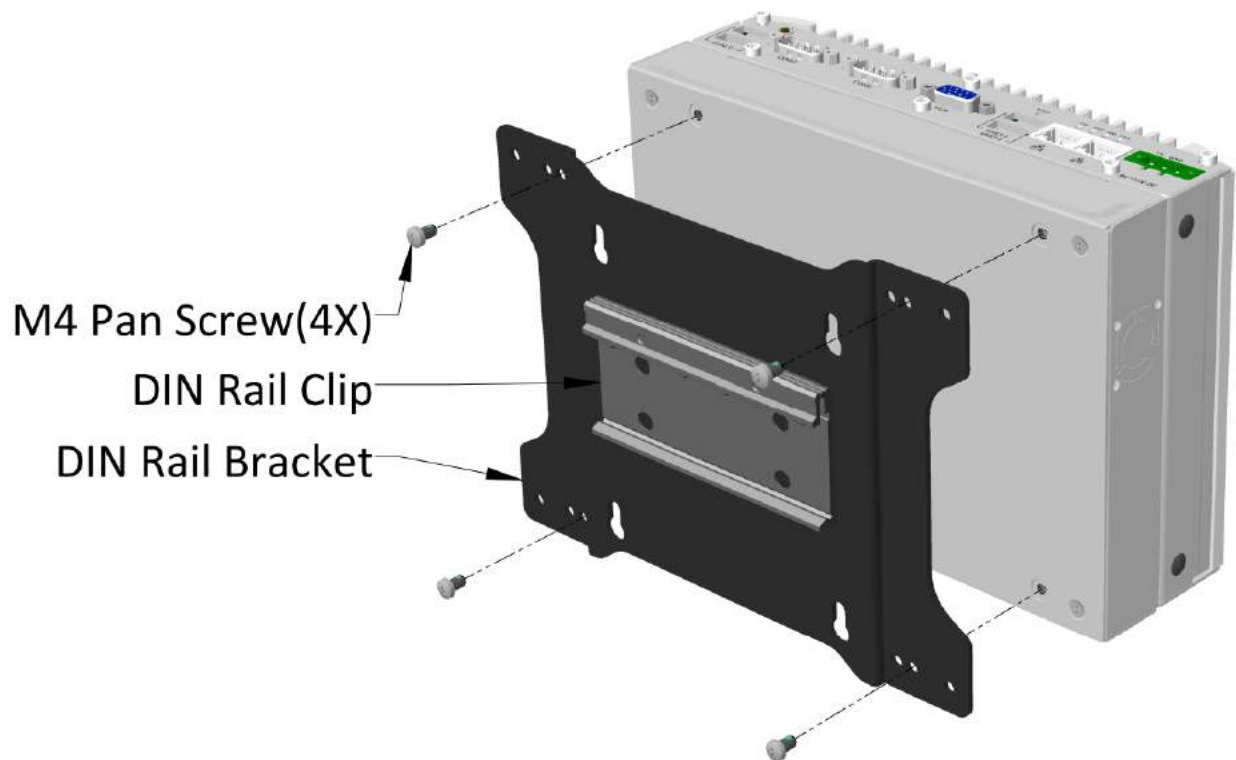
Assemble the DIN-rail Bracket Nuvo-2500 and Nuvis-2520at
